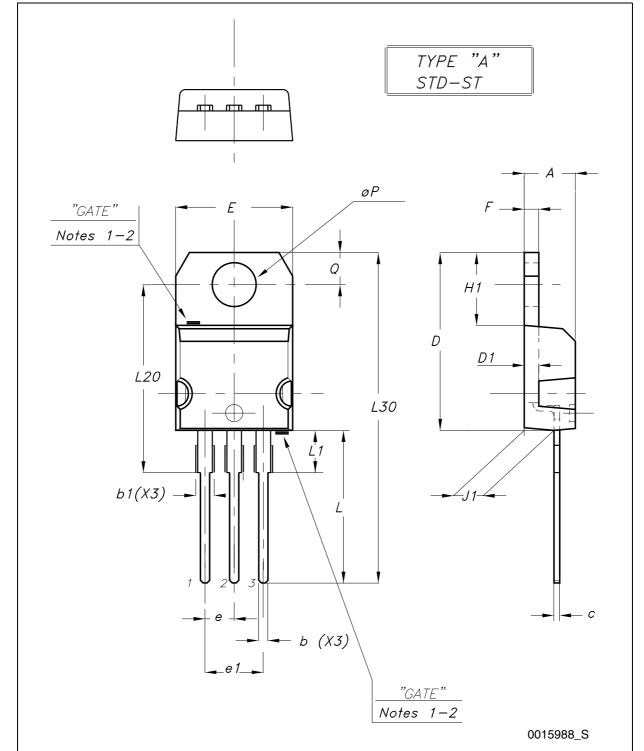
Drawing dimension TO-220 (type STD-ST Dual Gauge)
